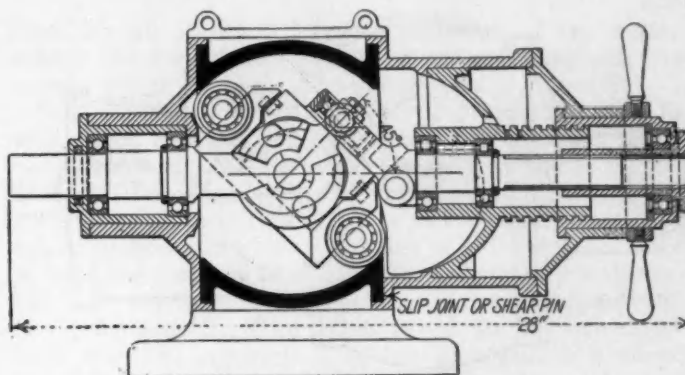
LONGITUDINAL SECTION OF A TRANSMISSION EQUIPPED WITH A STEEL-BALL-TYPE UNIVERSAL-JOINT
